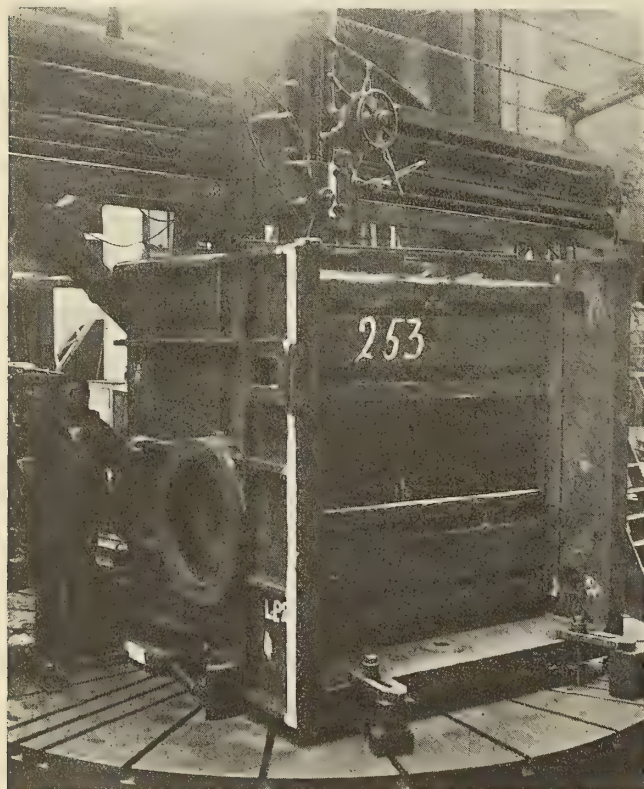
Boring a Cylinder on a Large Vertical Mill
